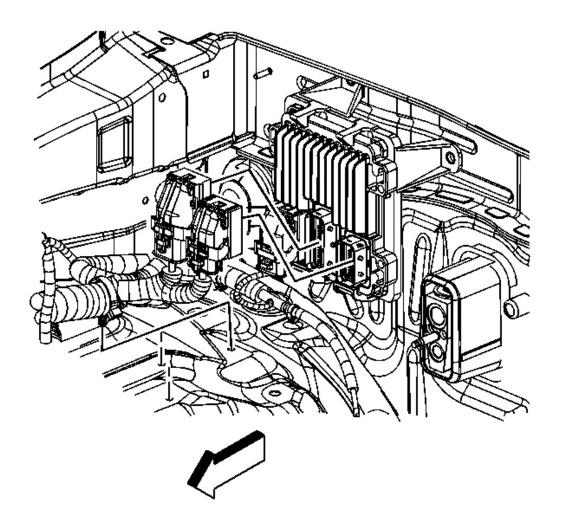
Locating PCM & Engine Wiring Harness PCM Connectors Courtesy of GENERAL MOTORS CORP.
